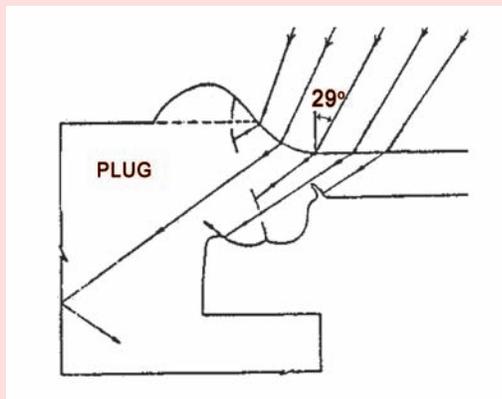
Ultrasonic testing of end cap welds for lack of fusion and root cracks.
